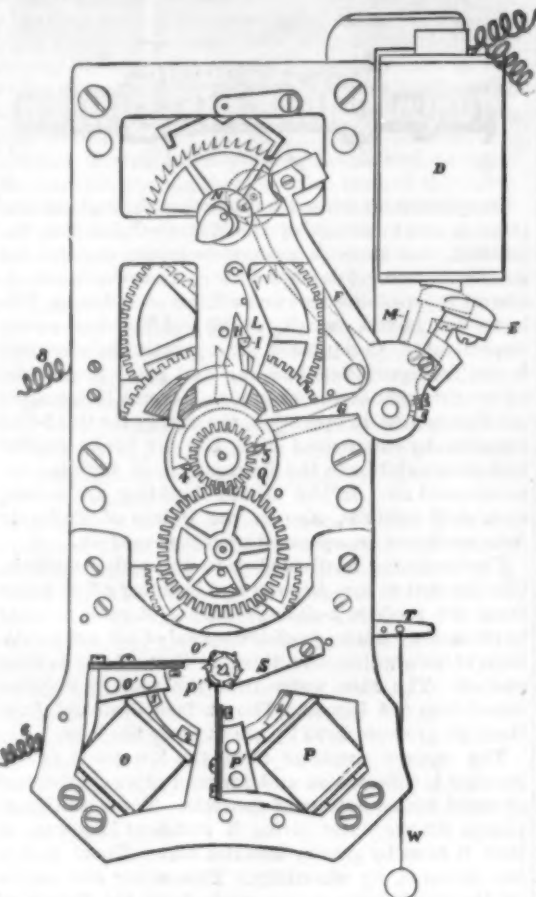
THE SELF-WINDING AND SYNCHRONIZING MECHANISM.
